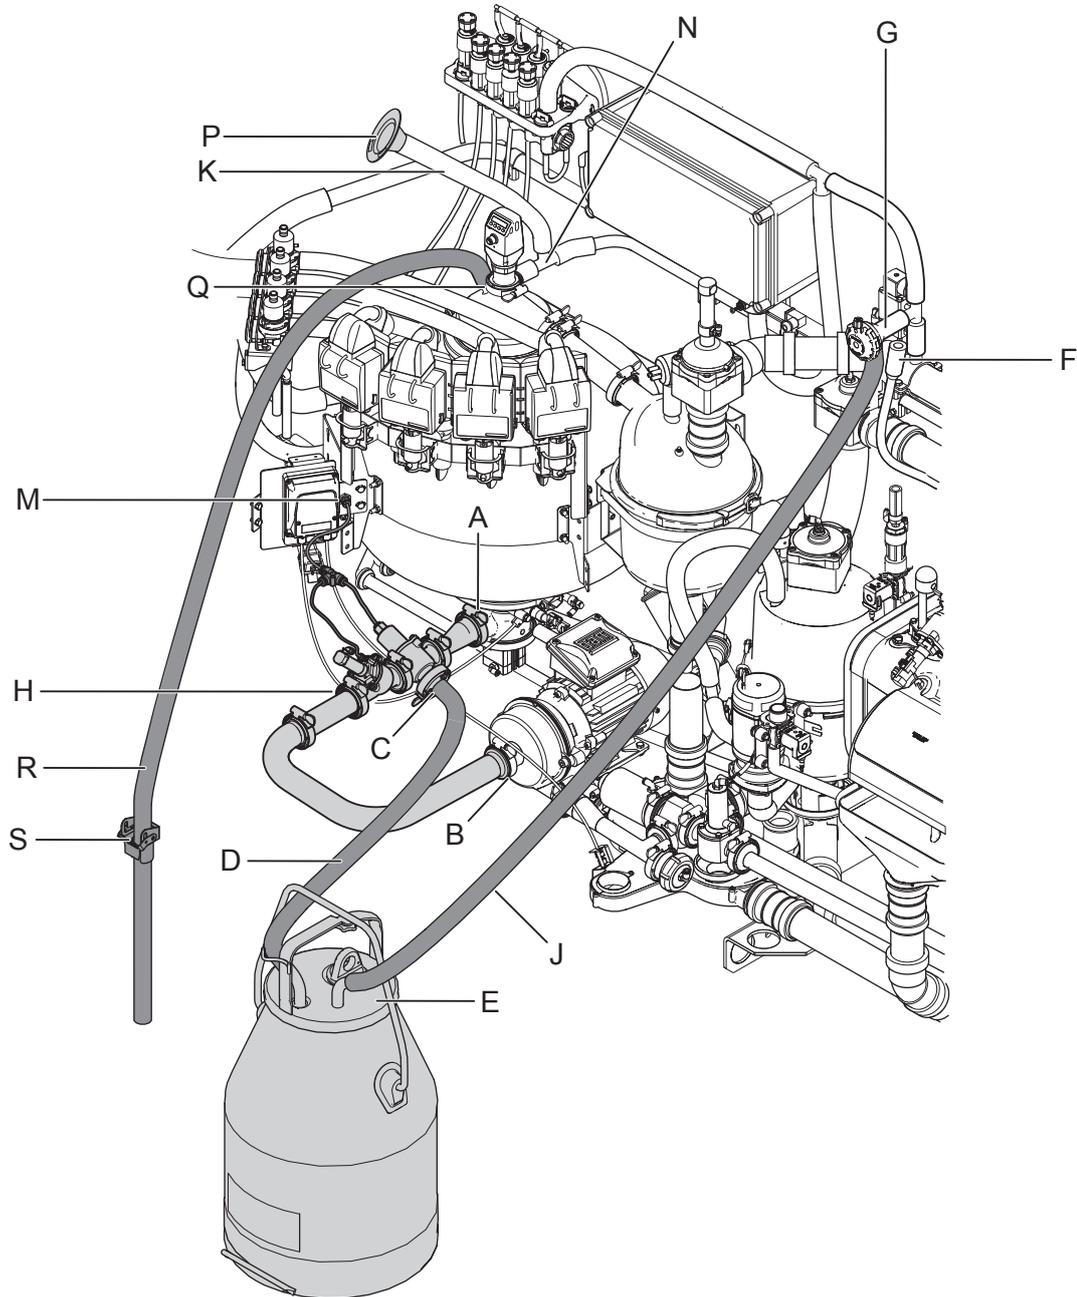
The milk meter MM27 calibration setup with the calibration valve assembly (H), vacuum and milk tubes (J, R), and a milk bucket.
